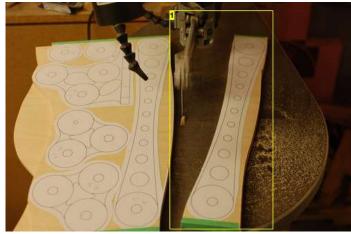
Just a rough cut is needed at this point. Finish cutting is done after the holes are drilled.
